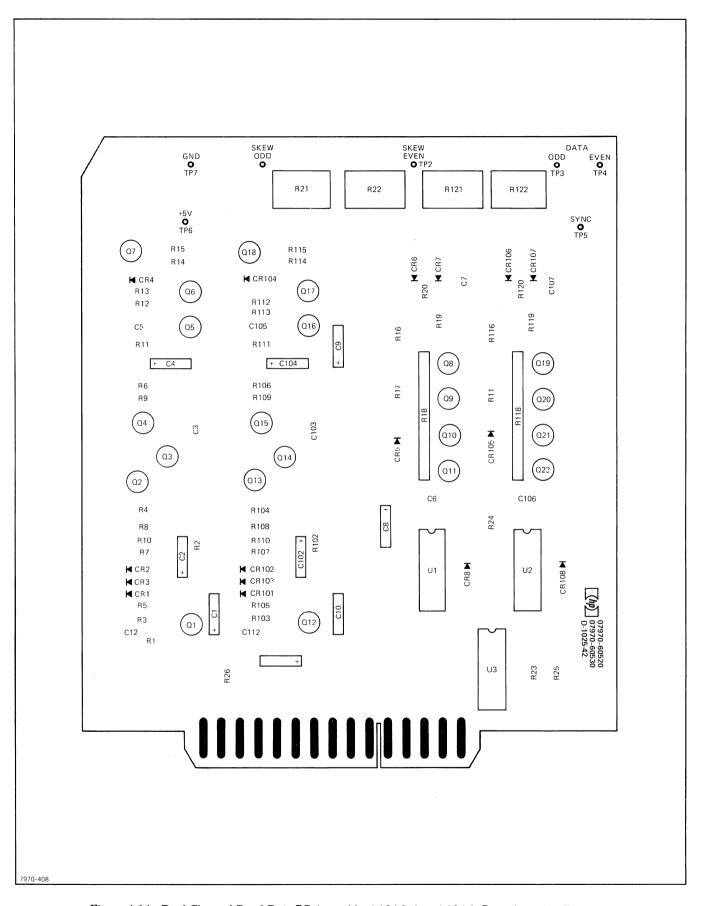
Dual-Channel Read Data PC Assembly A18A3 thru A18A6, Parts Location Diagram
